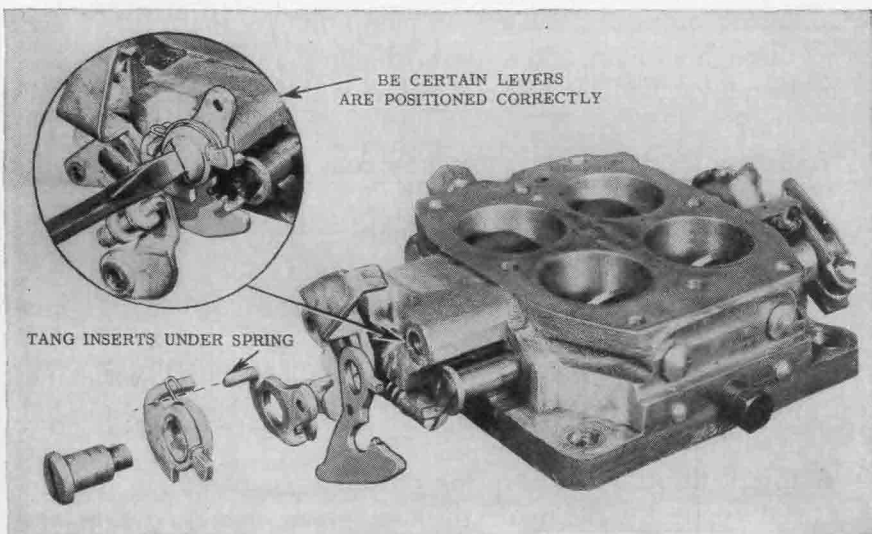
Installing fast-idle-cam assembly. (Oldsmobile Division of General Motors Corporation)
